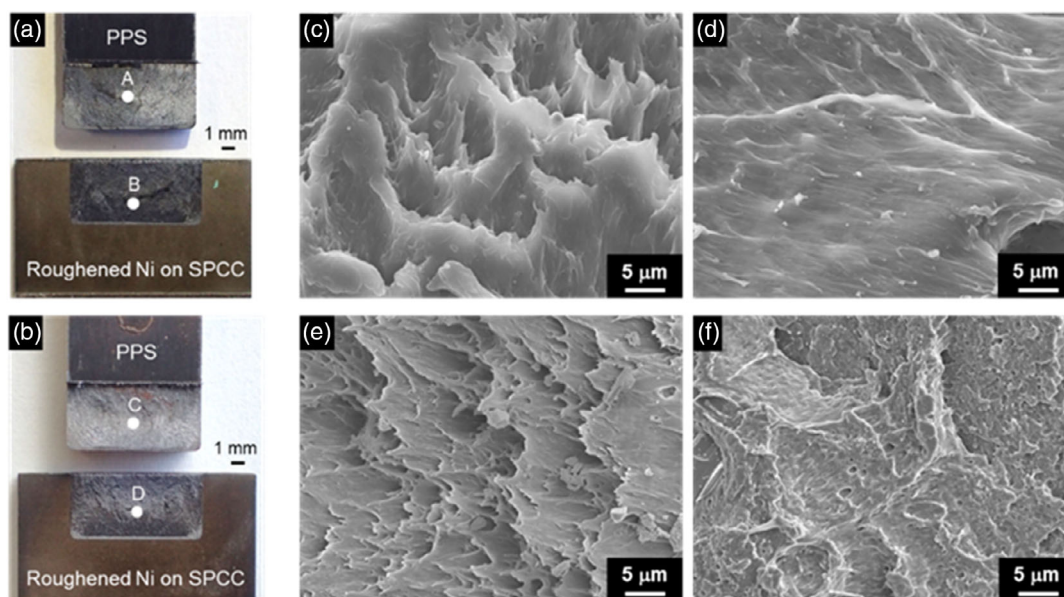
Fracture surfaces of the bonding samples before and after the high-temperature and high-humidity test (2000 h). a) Photograph of fracture surface before the test, b) photograph of fracture surface after the test, c) surface SEM image of point A in (a), d) surface SEM image of point B in (a), e) surface SEM image of point C in (b), and f) surface SEM image of point D in (b).
